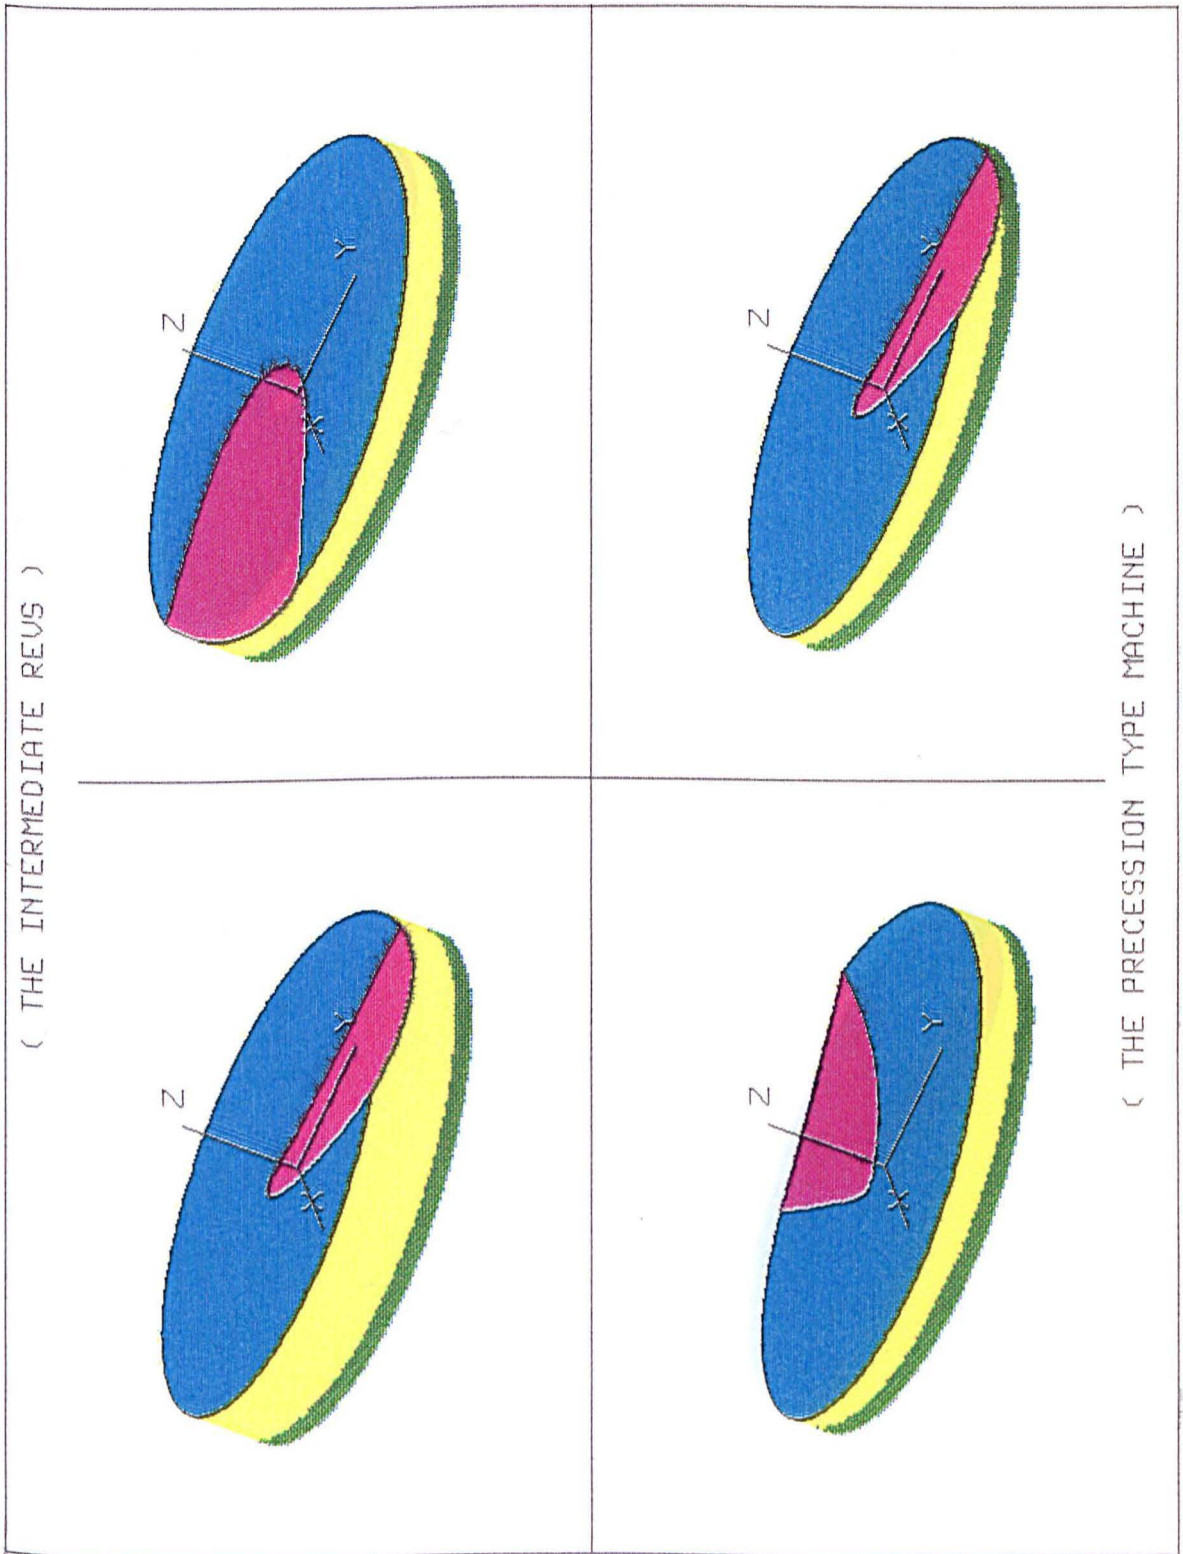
Surface illustration of a workpiece being deformed by an imaginary inclined tool
